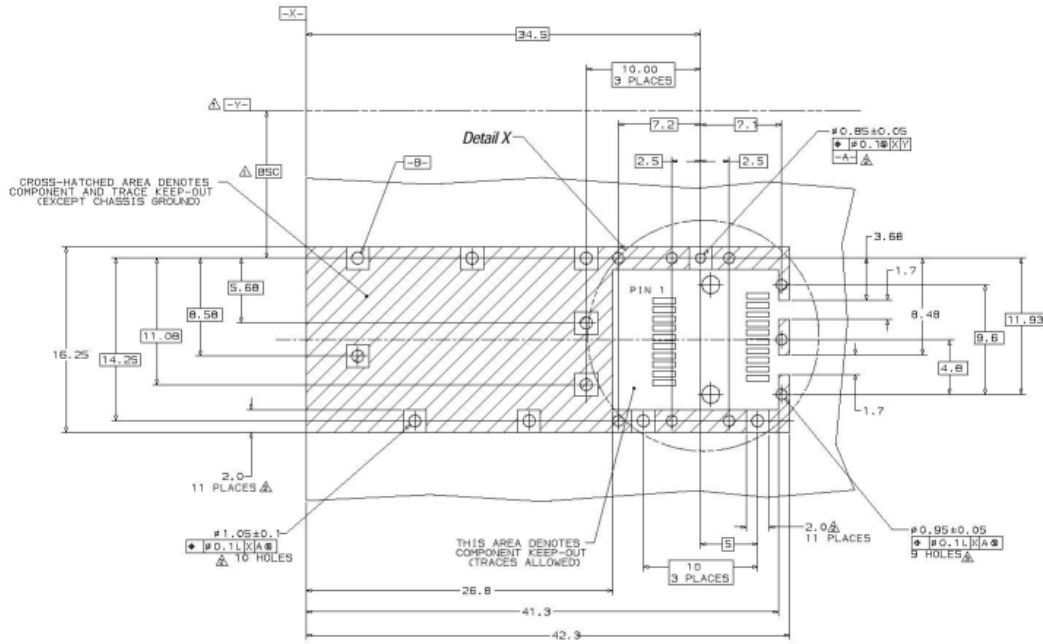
Mechanical Dimensions of Electrical Connectors on SFP+ SONET module PCB
